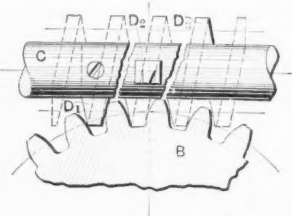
Helical Path of Fly-tool for Cutting Worm-wheel shown in Fig. 1.
